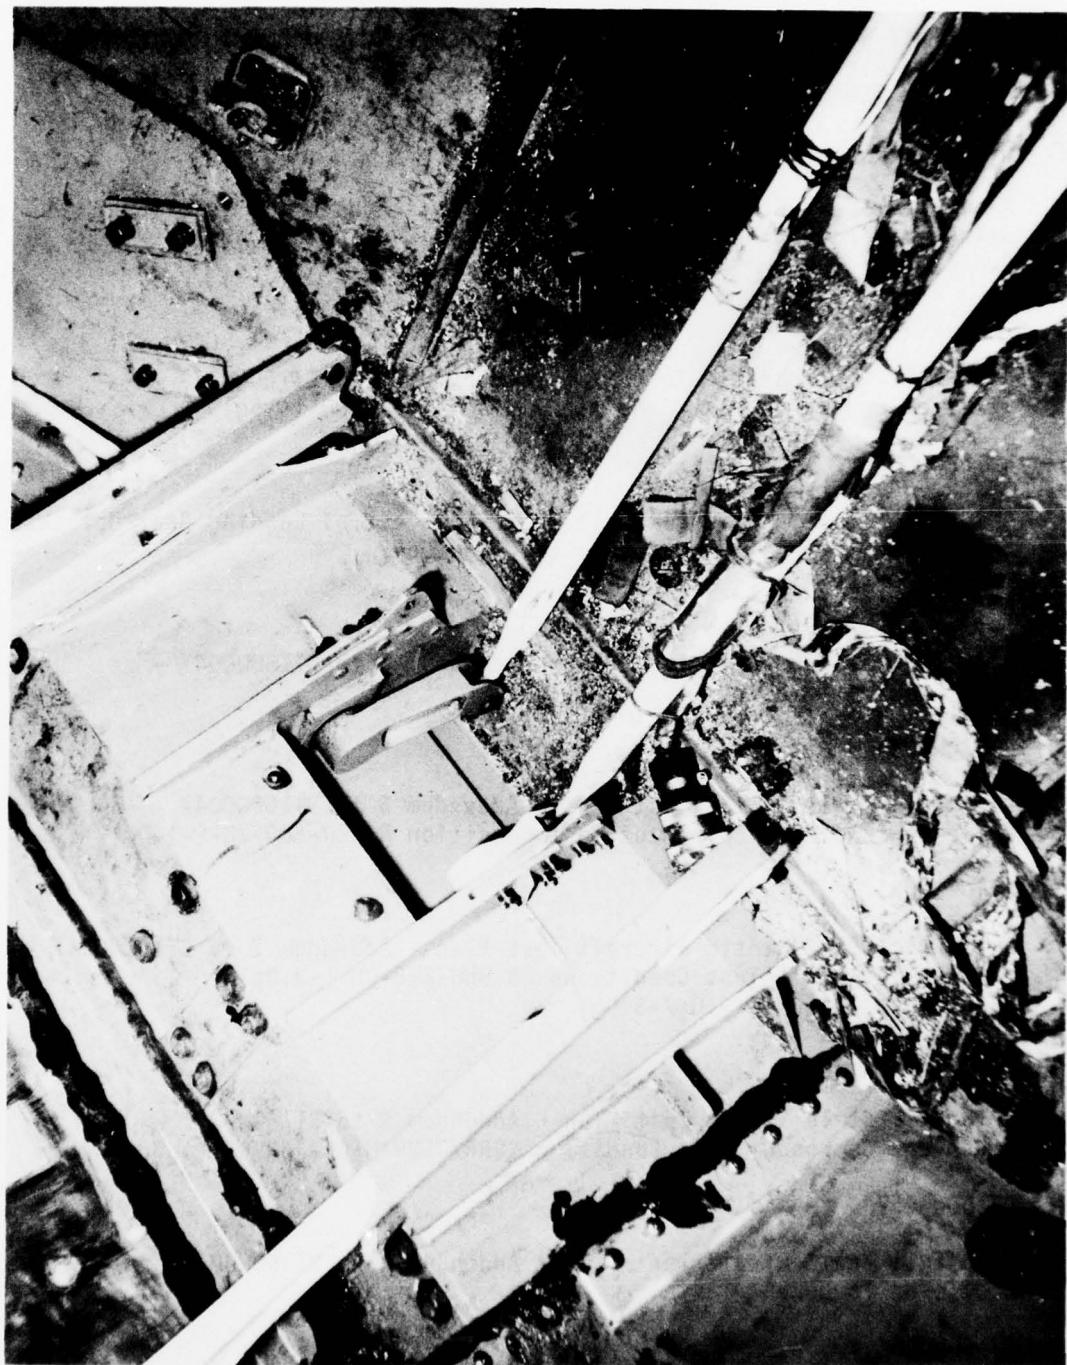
Support Casting (Part No. 160D116027) After Failure
